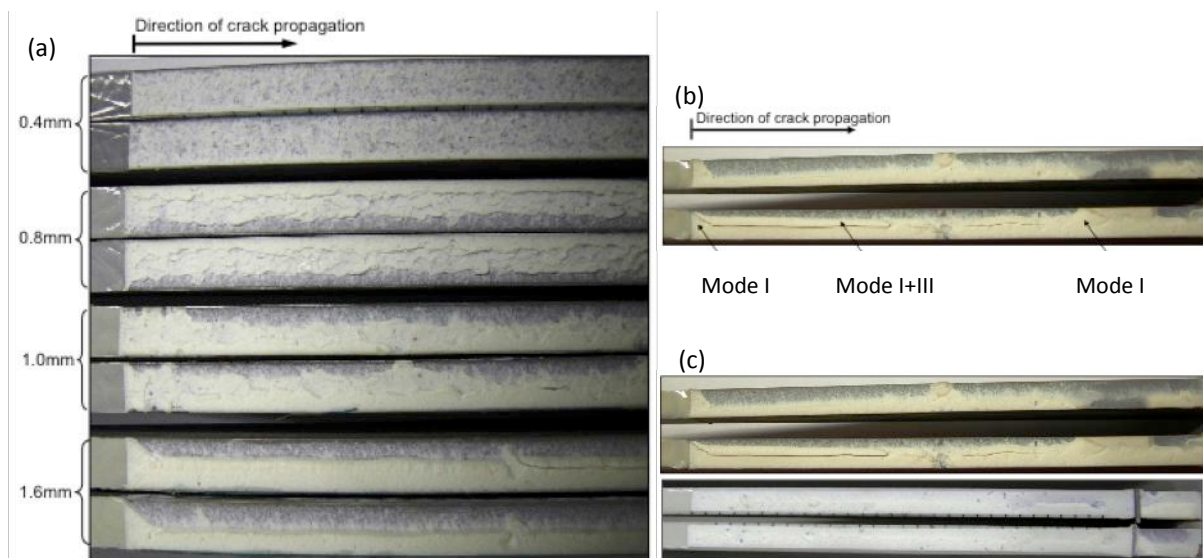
(a) Typical fracture surfaces of 10 mm wide Aluminium TDCB specimens with various BGT, (b) features on a 2 mm BGT fracture surface, (c) top; no side groove, bottom; side groove.
